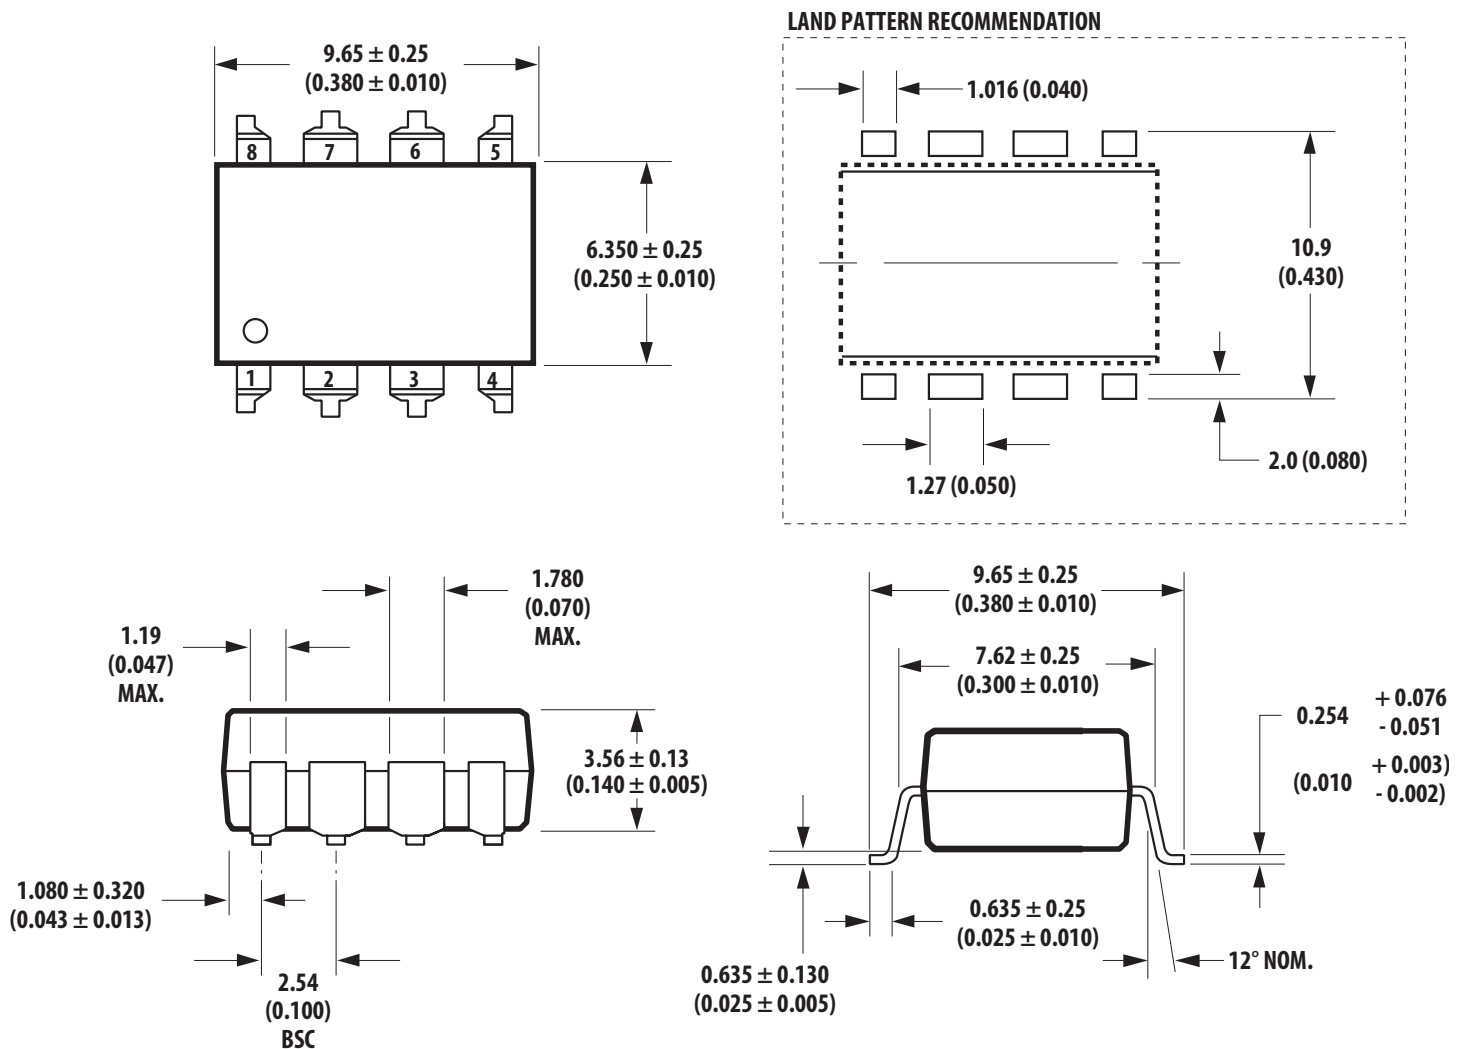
8-Pin DIP Package (HCPL-2530/2531/4534)
